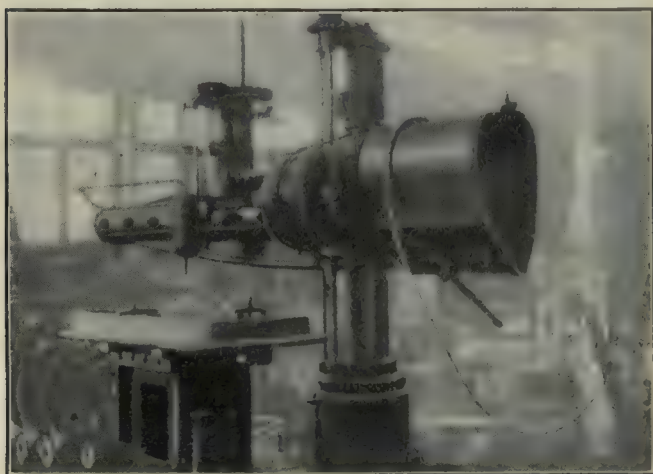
REAR OF DIRECT-CONNECTED RADIAL DRILLING MACHINE
